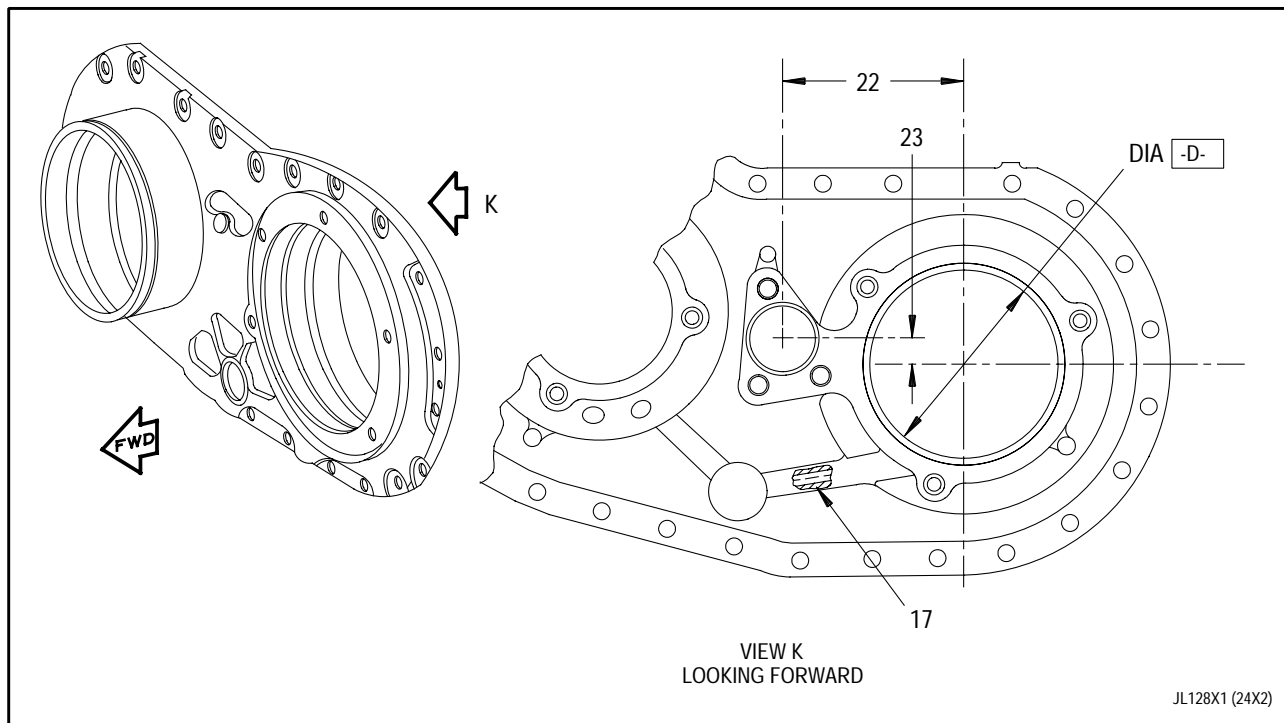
Gearbox (Front) Housing Assembly - Snap Diameter Repair (Sheet 2 of 2)
